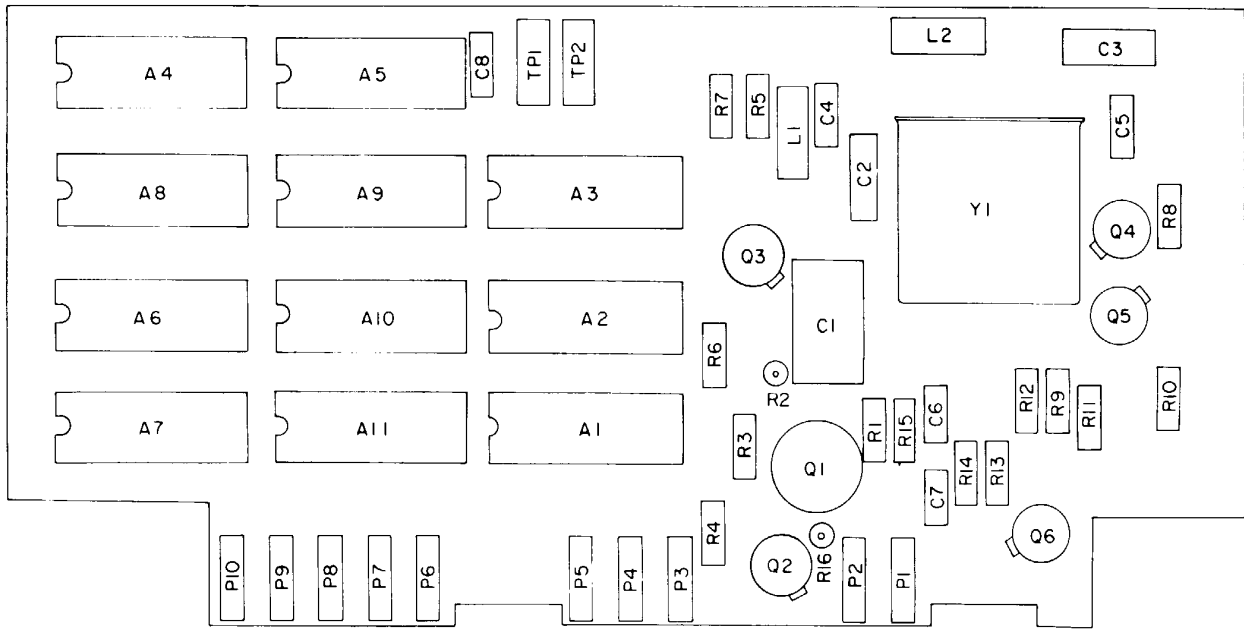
Mode Generator Assembly (01A233756-21-11) (A2), Component Locations
